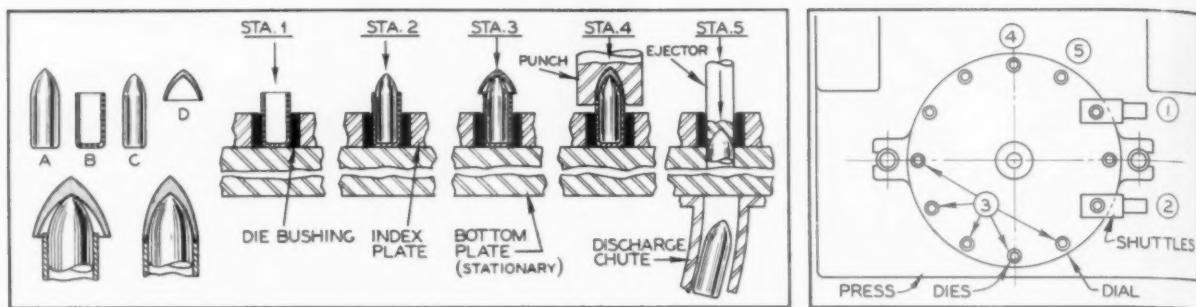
, at left, a jacketed bullet—A—and sequence of assembly. B, C, and D show a cupro-nickel shell, a hardened steel core, and a copper nose in order of assembly. E and F are enlarged views of the several components before and after crimping.
